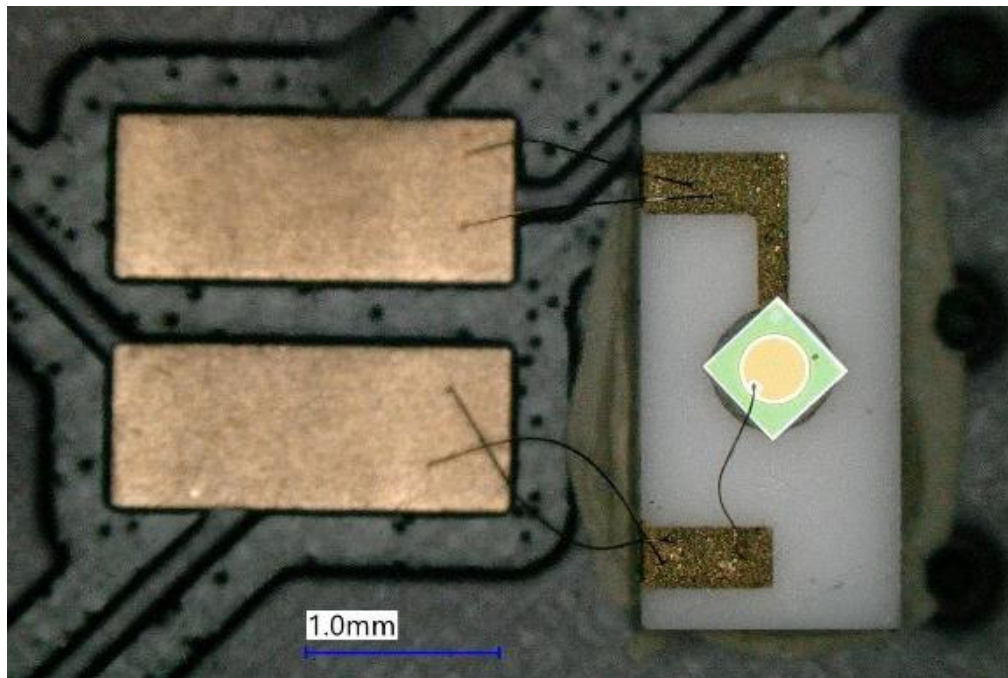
The device is on a small ceramic block with contact pads on top. The device is the circular yellow region. The device pads are wire bonded to the PCB pads.
